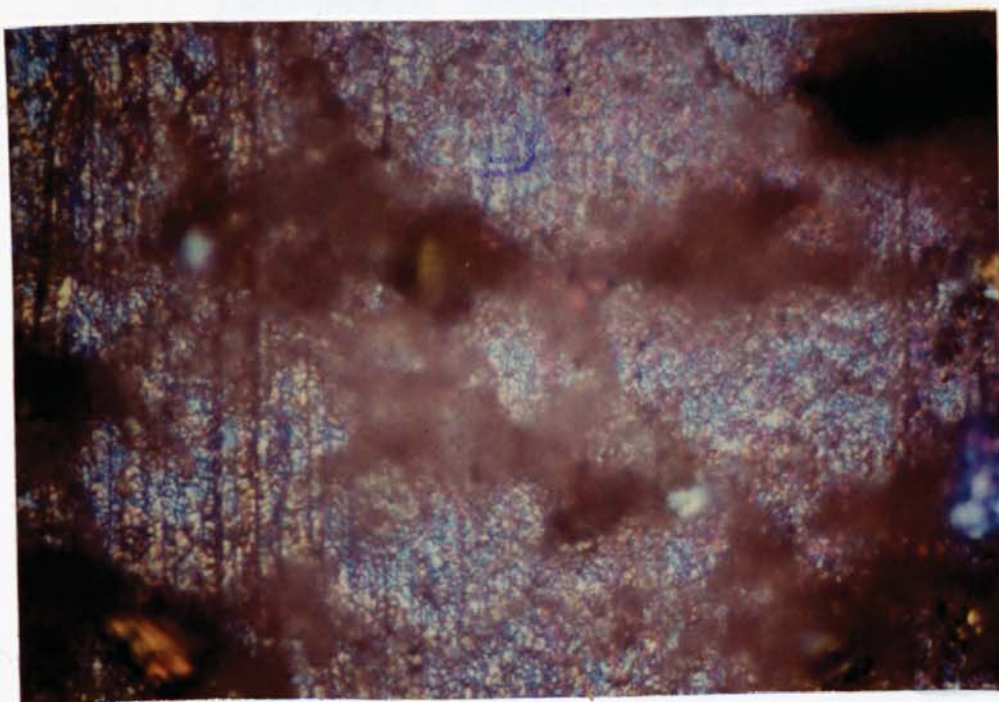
Fracture surface of unexposed 5251/deoxidised/
